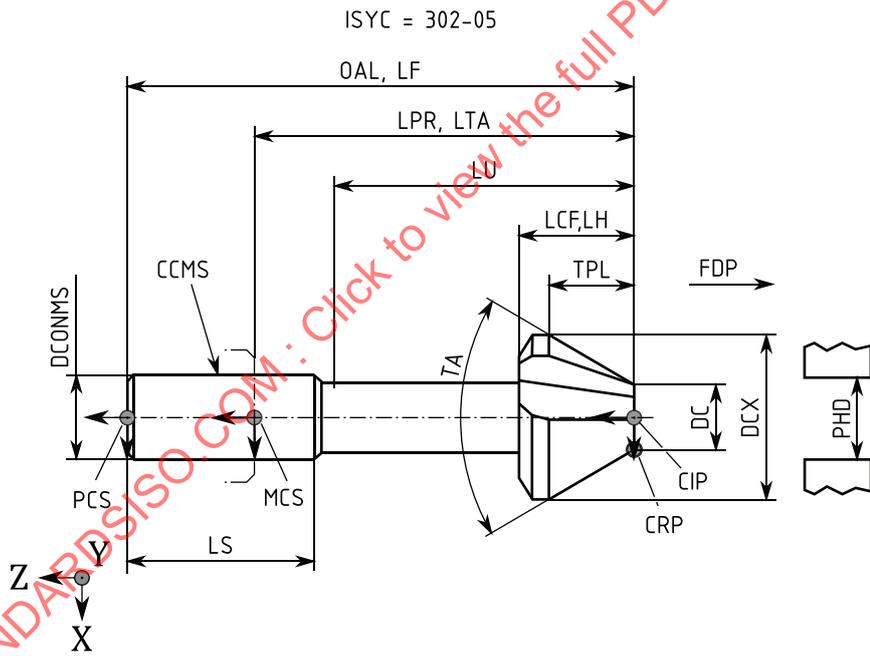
ISYC 302-05 - Tapered countersinking tool, cylindrical shank, solid
